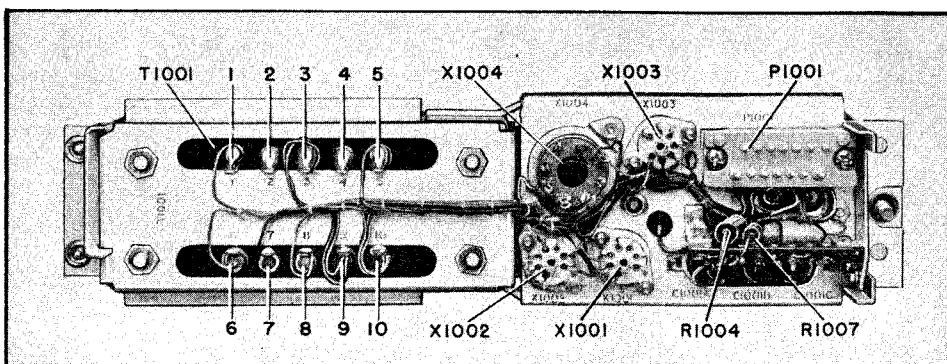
Comparator Power Supply Chassis, Bottom View
